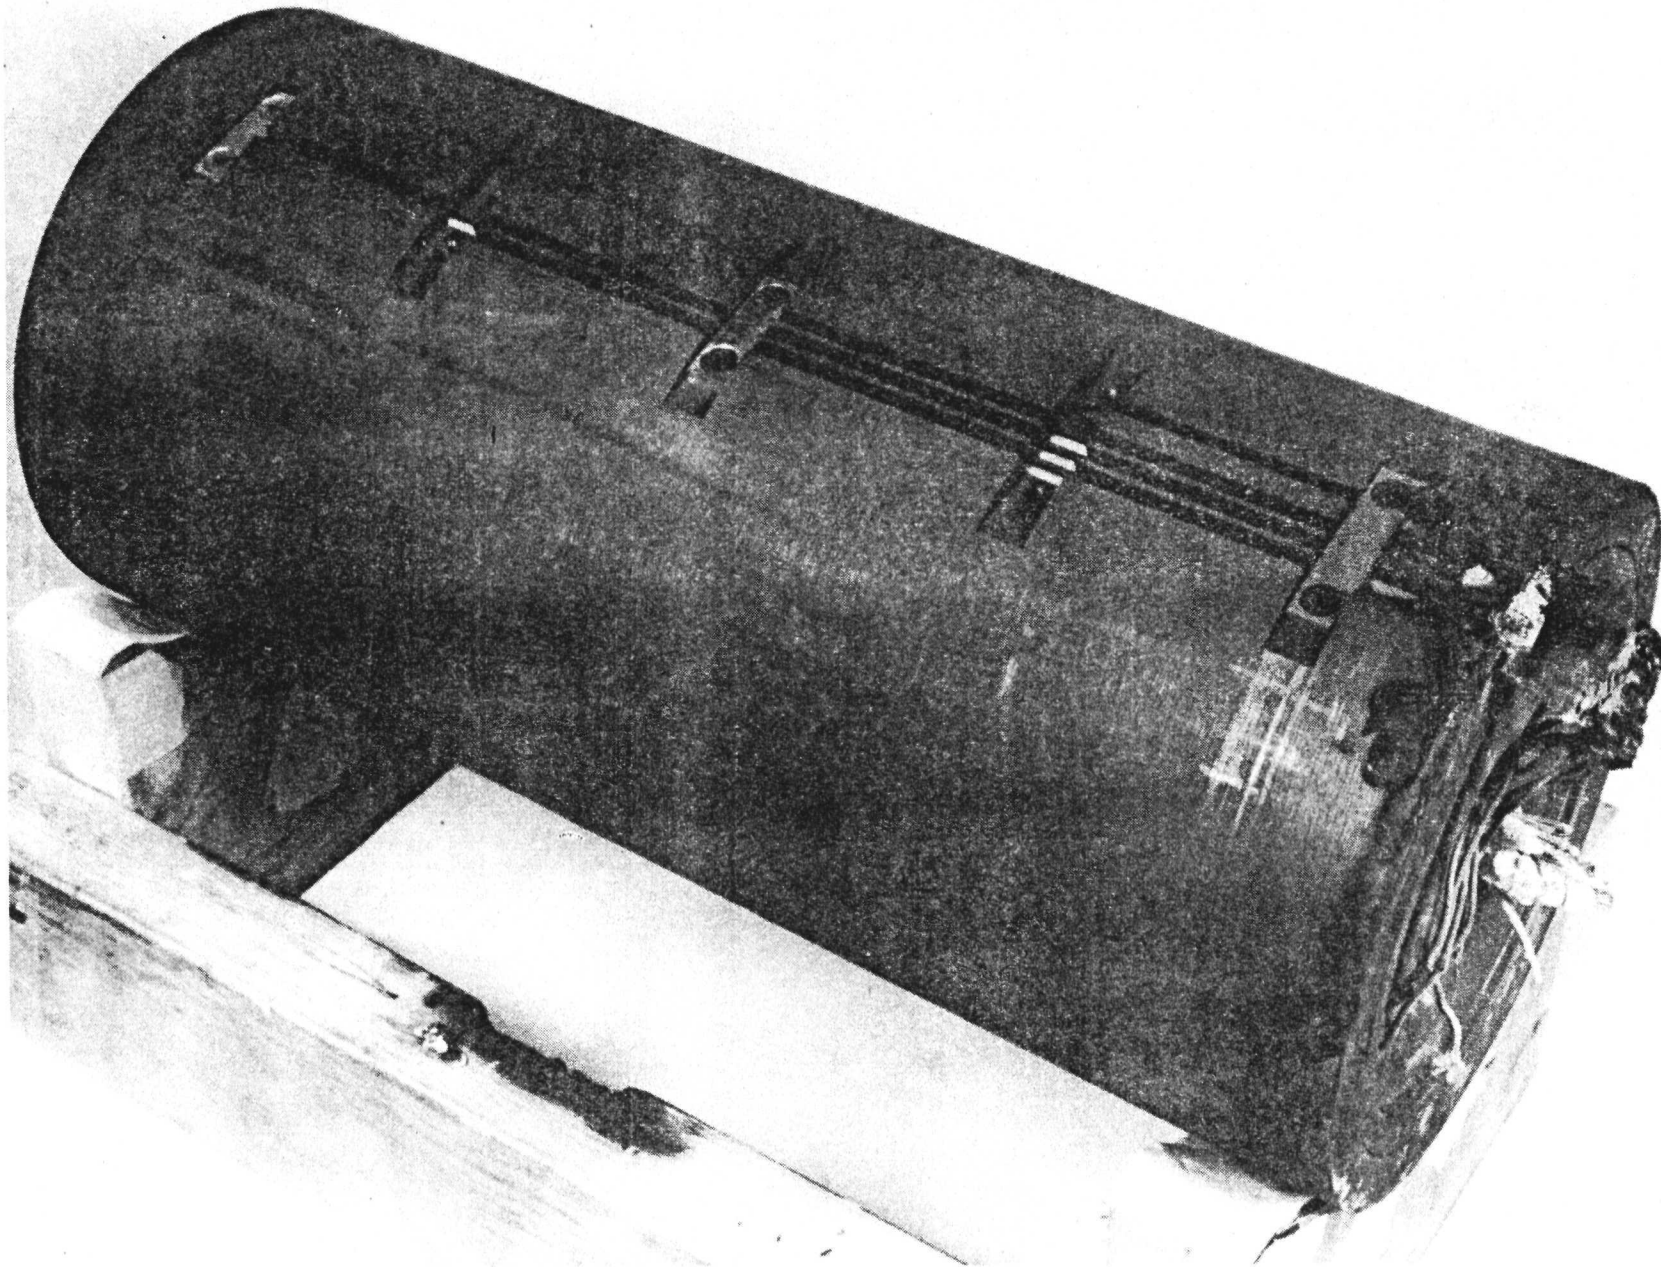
HEATER BLOCK ASSEMBLY REMOVED FROM THE EHSA. THE DETERIORATION OF THE LOWER END CAN BE SEEN.
